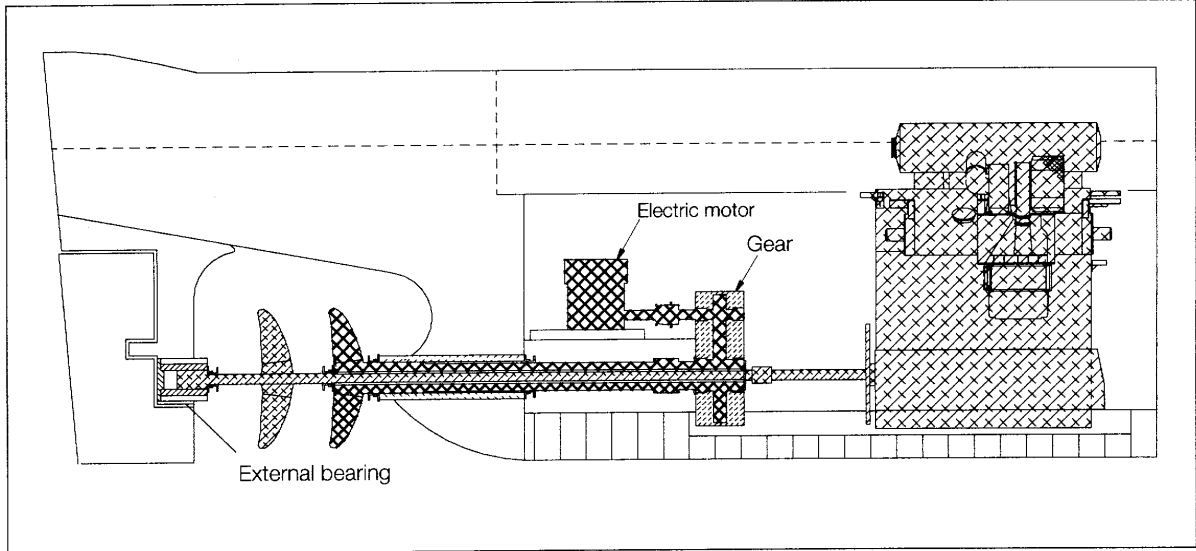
1 x low speed main engine with contra rotating propeller. External bearing for inner propeller shaft
